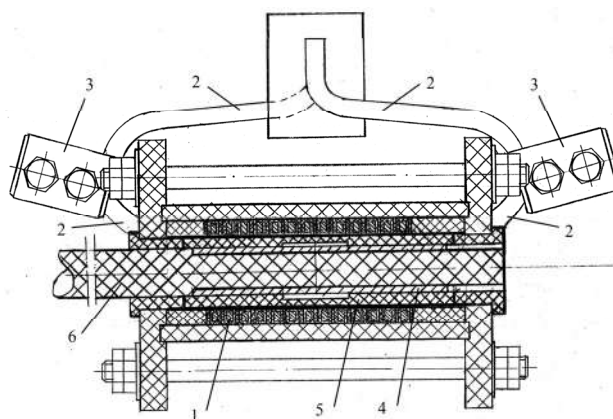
Coil for magnetic-pulse expansion of cylindrical tubular workpieces
